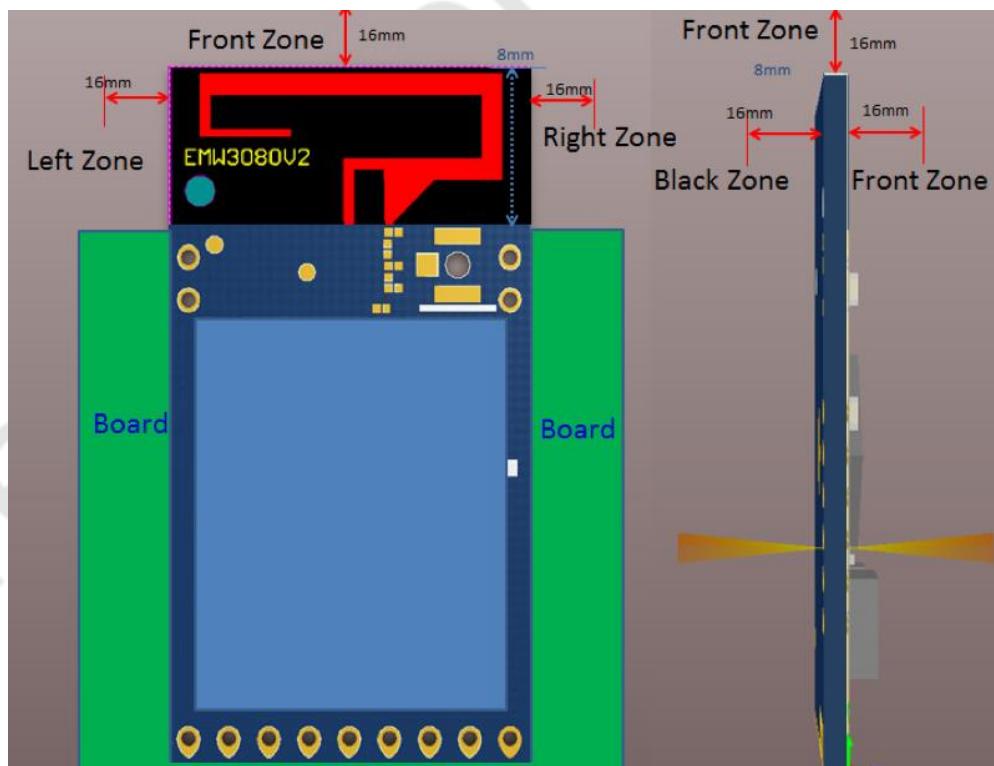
Minimum Clearance Zone of PCB Antenna (Unit: mm)
